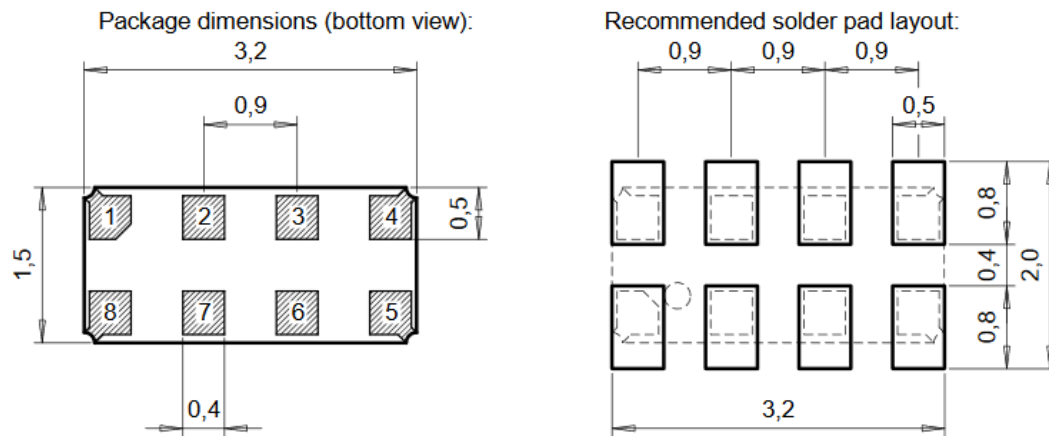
Package dimension and recommended solder pad layout of the RV-3028-C7
